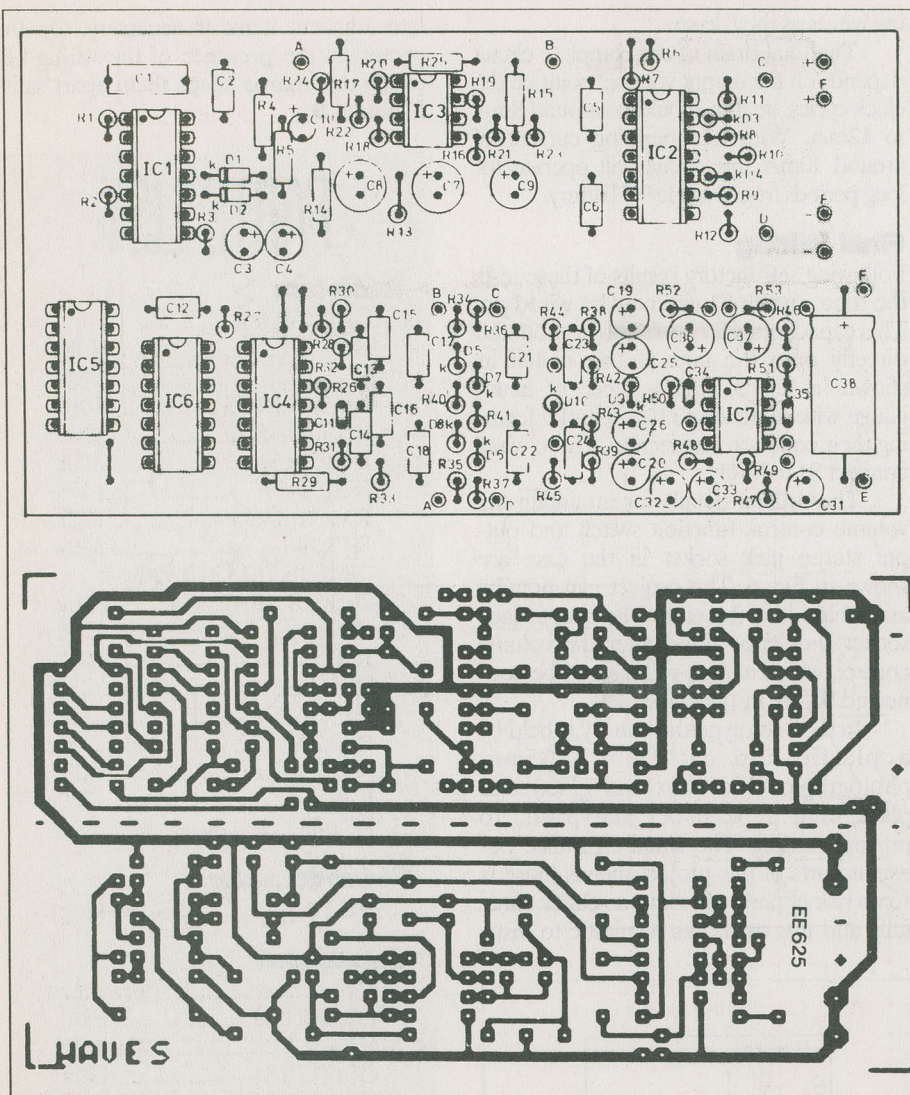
The PCB and component layout. This board is cut in half if using the case specified.
